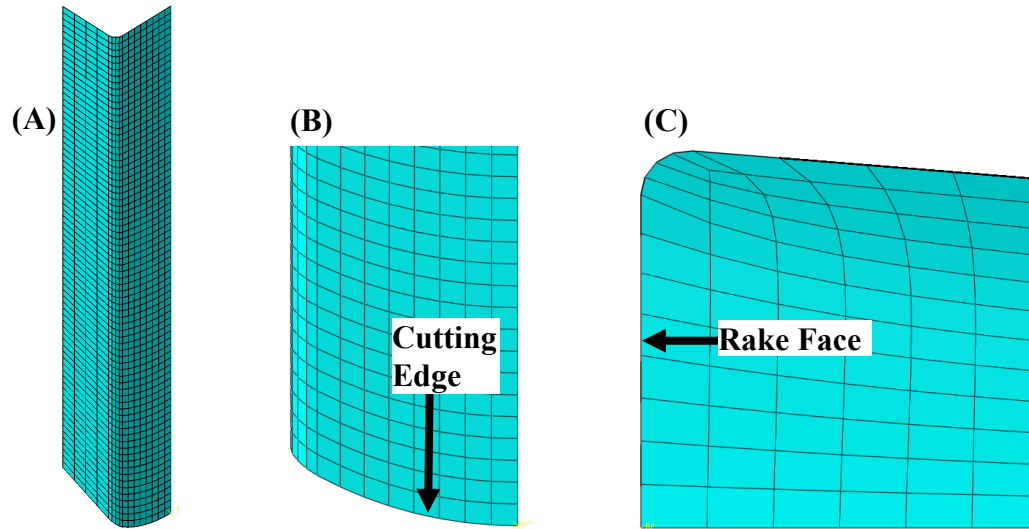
Tool mesh 3D view (A), rake face view (B), and top down view (C)
